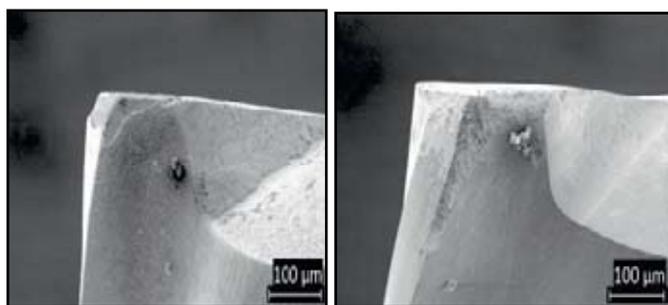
(c). TiN Coated Tool, (d) TiAlN Coated Material After 2mm Depth of Cut [4]
